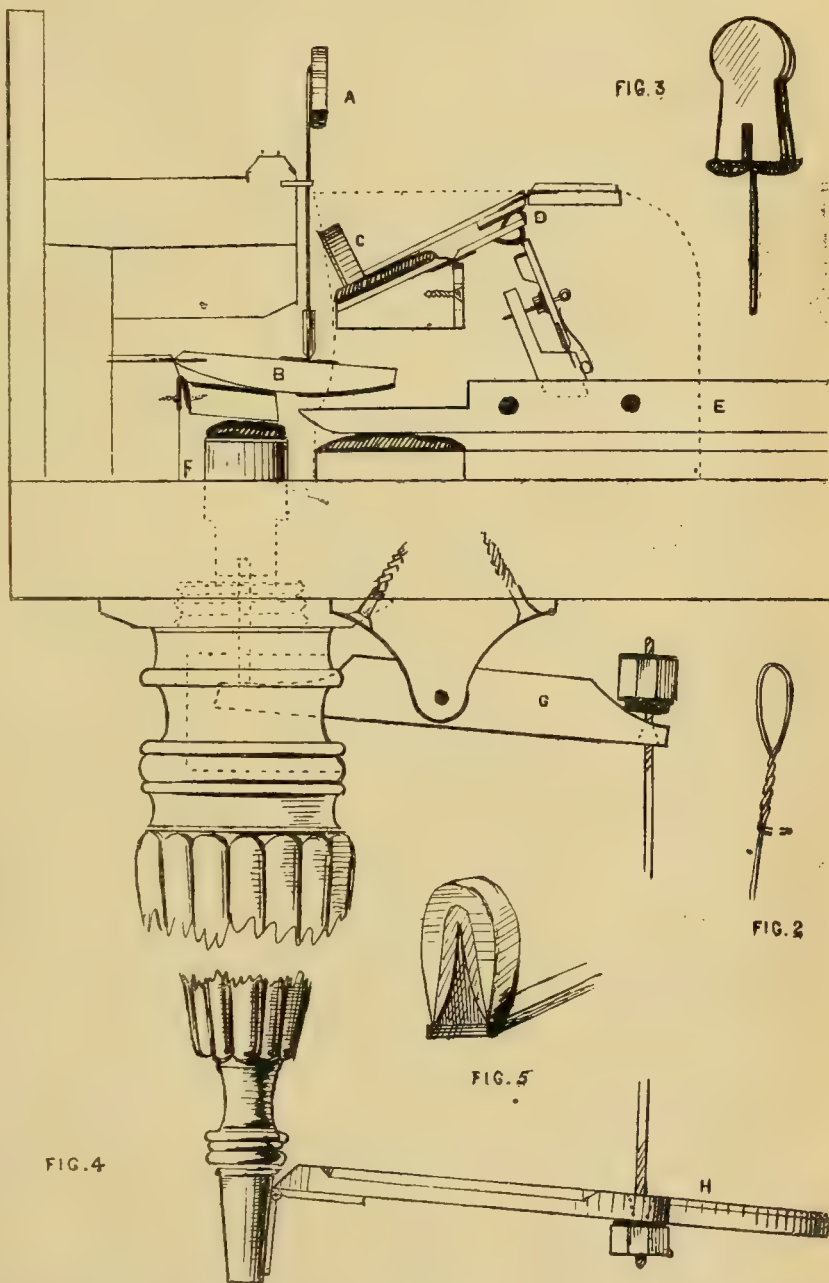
EYE FOR STRINGING. FIG. 3.—DAMPER. FIG. 4.—SECTION OF PEDALLING—A, Damper; B, Damper Lever; C, Hammer; D, Hammer Lever; E, Key; F, Damper Rail; H, Pedal. FIG. 5.—HAMMER.
